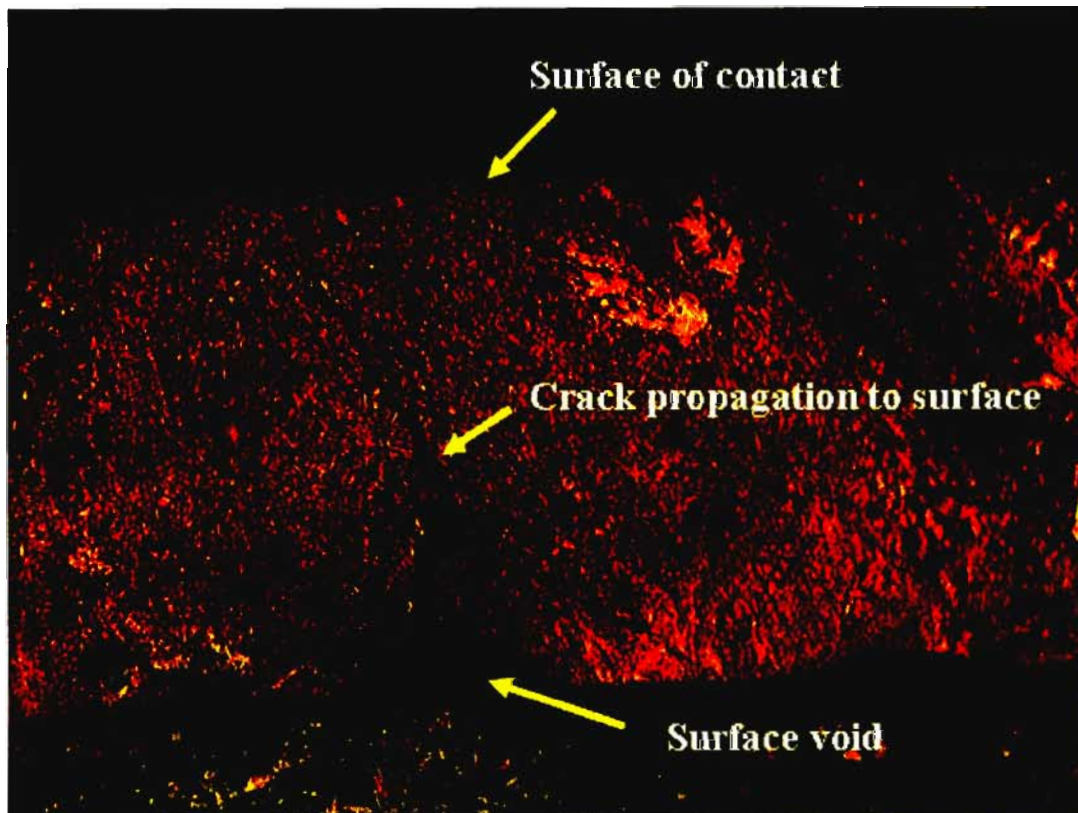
28 Surface crack in coating of specimen LC1500 following testing
